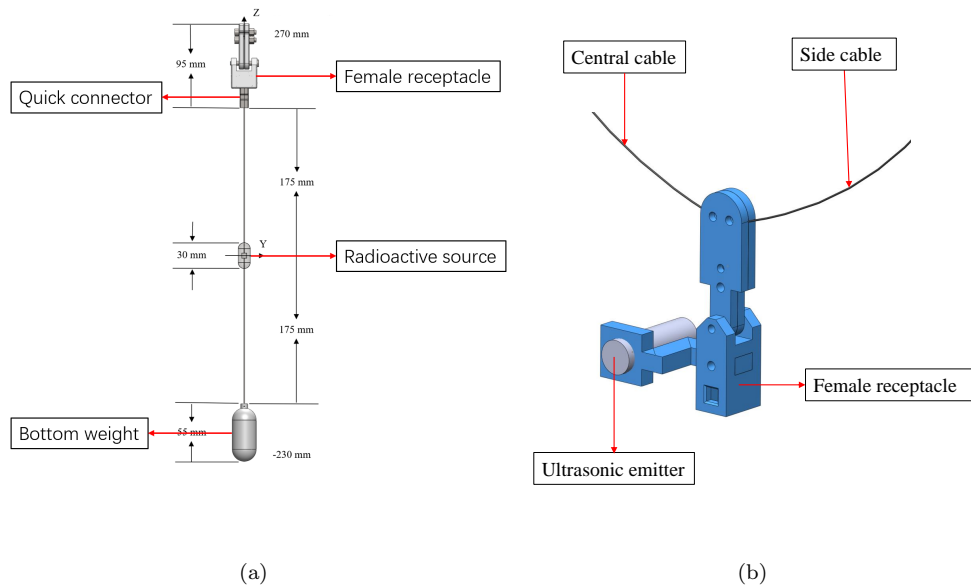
Design drawing of a source assembly (a); details of a female receptacle and the ultrasonic emitter (b).
